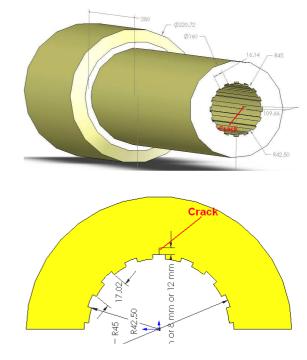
Geometry of the cannon barrel and crack position and dimensions
